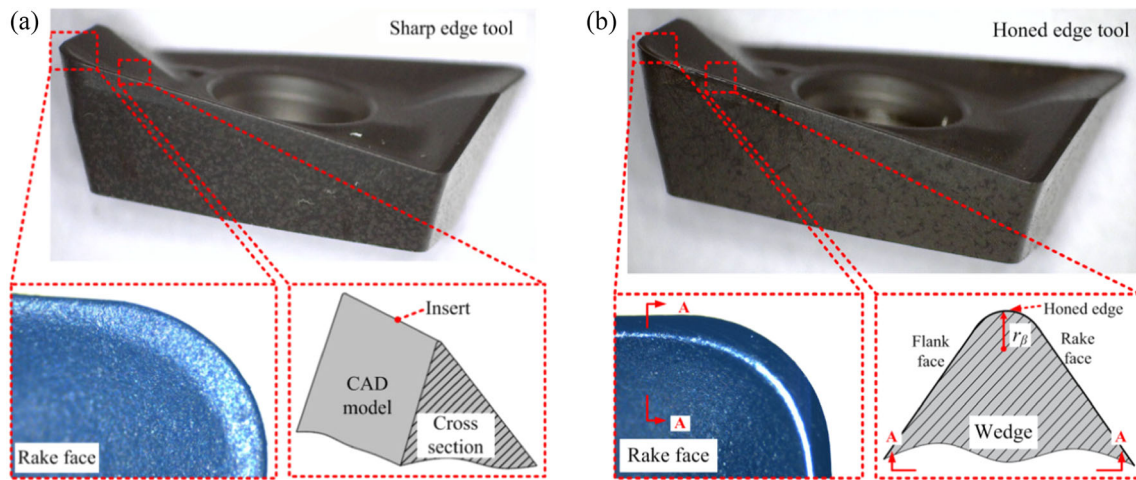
Characterization of the cutting edge micro-geometry. a Sharp edge tool. b Honed edge tool
